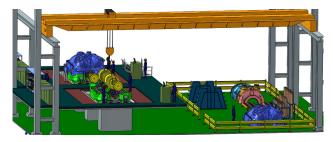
Turbine assembly workstations with fixed position layouts.
